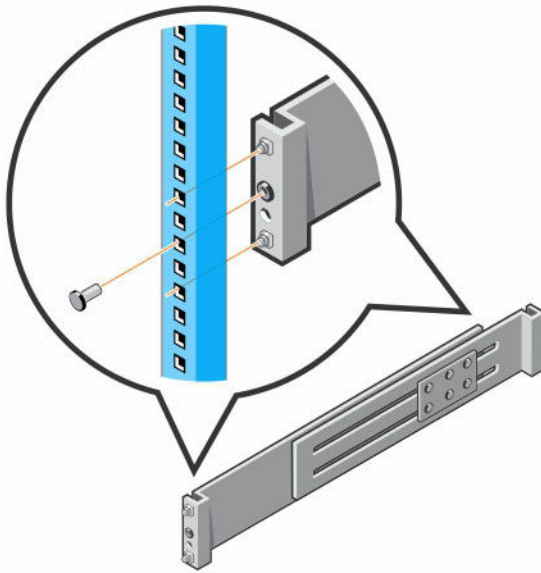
Insert the Screw into the Rack Mounting Screw Hole
